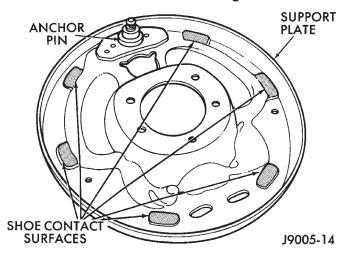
Shoe Contact Surfaces (9-Inch Support Plate)
